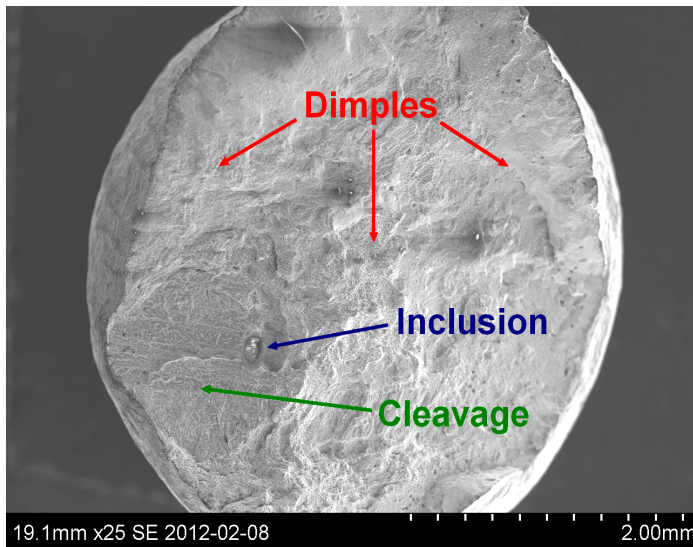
Fracture section of 5Ni\_weld at 20°C
